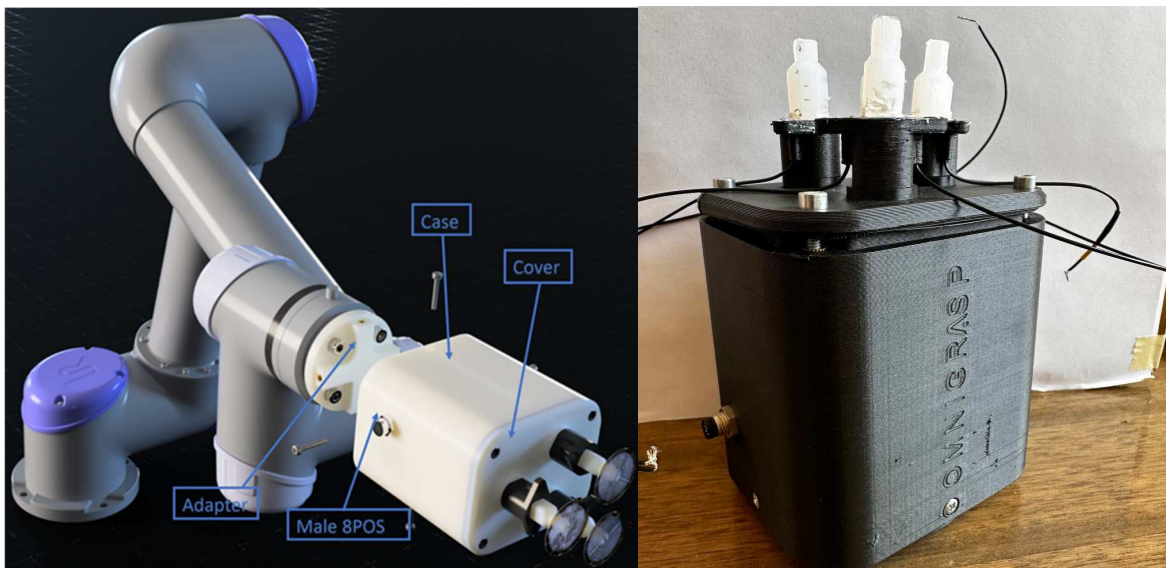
Assembly of the EA gripper with the 3 EA skins, the case, the connector and the adapter. CAD (left) and prototype (right)
